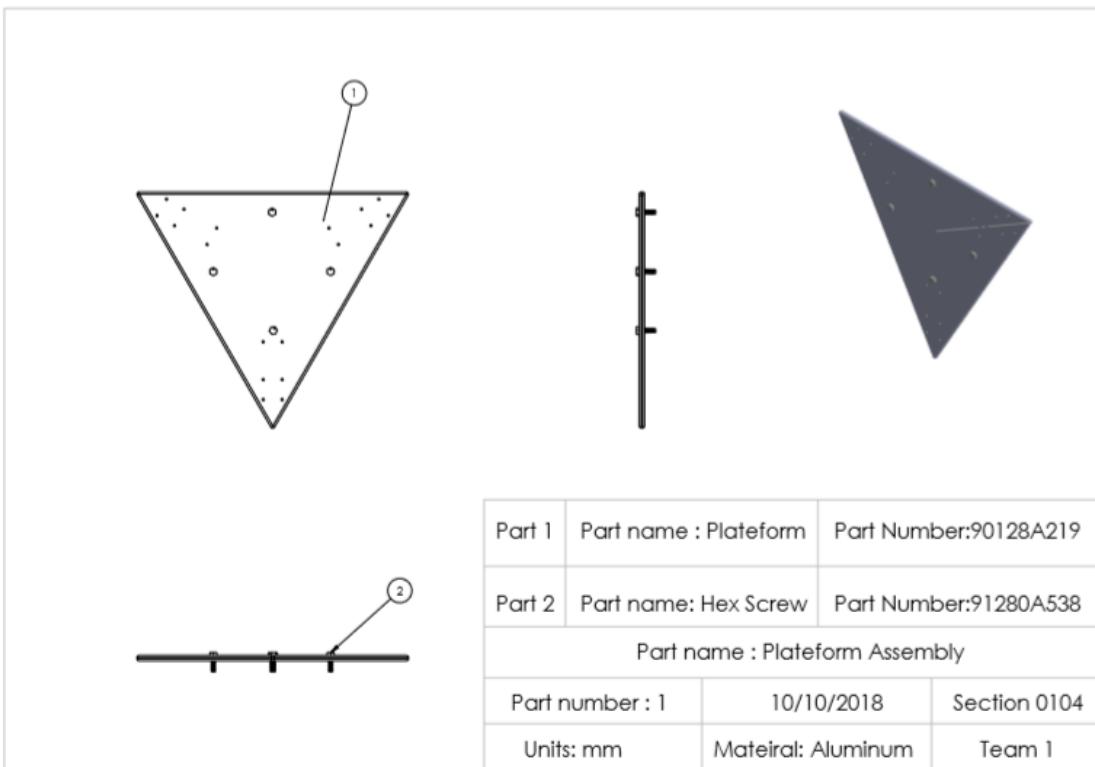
Engineering drawing of the robot platform with bolt holes for the robot
